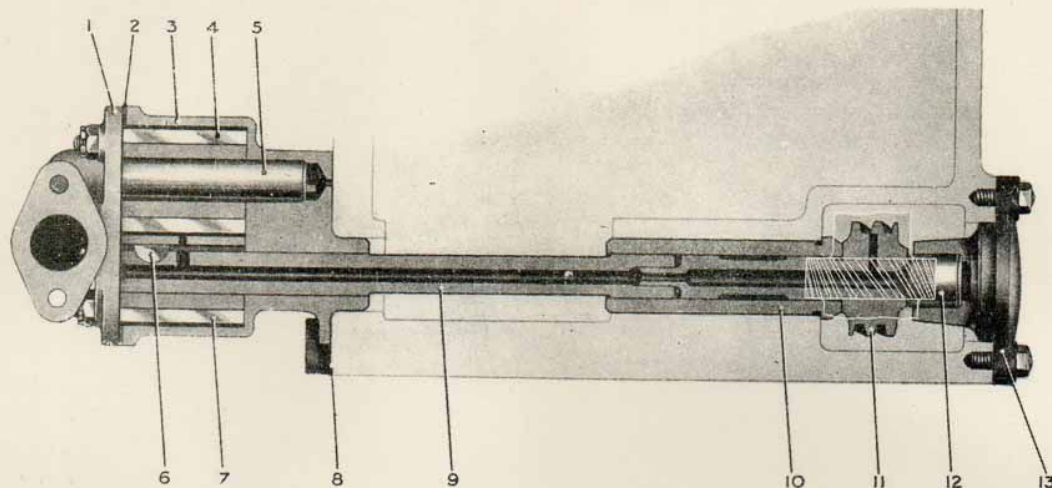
PLAN VIEW OF OIL PUMP AND DRIVE.
